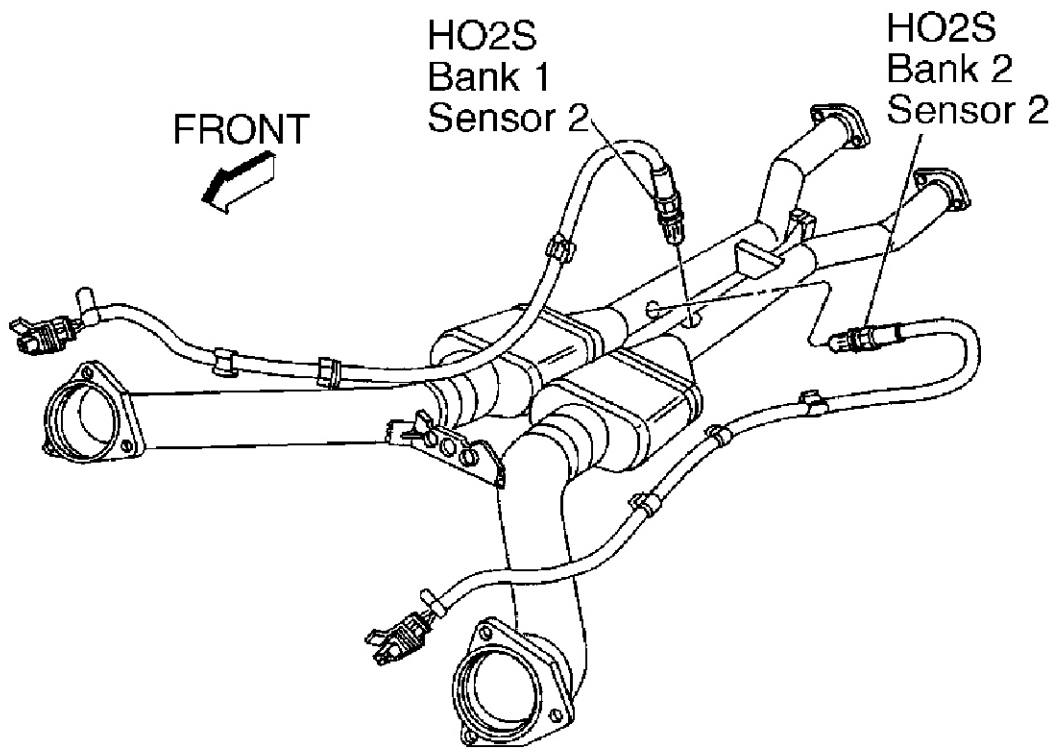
Locating Bank 2 Sensor 2 Heated Oxygen Sensor (5.7L - Camaro & Firebird)
